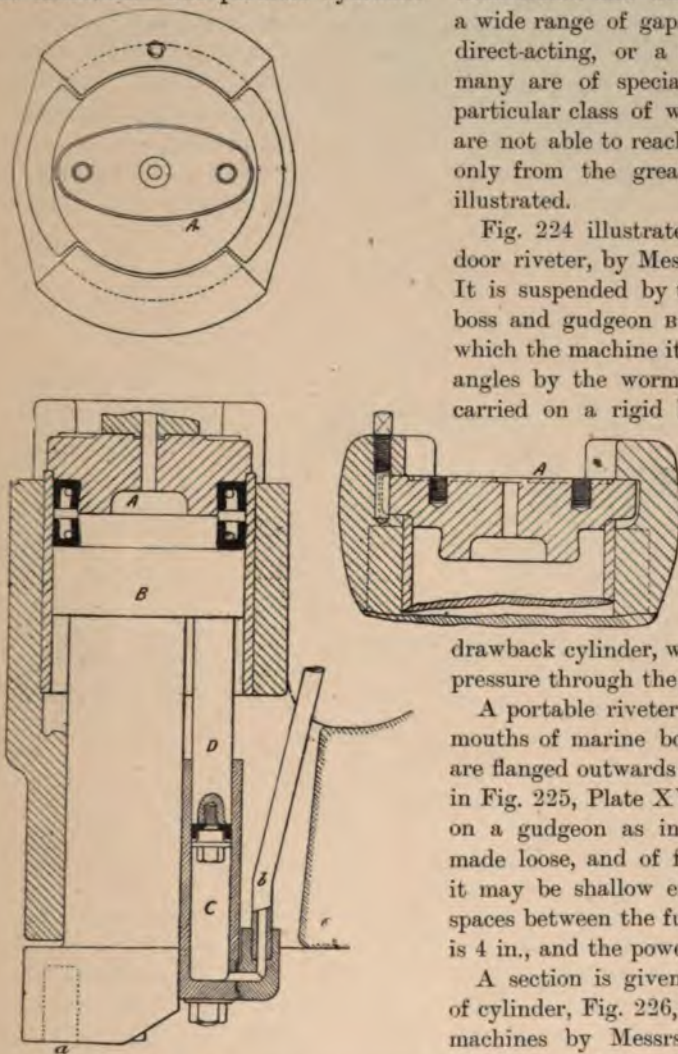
Section through Cylinder of Hydraulic Riveter.
